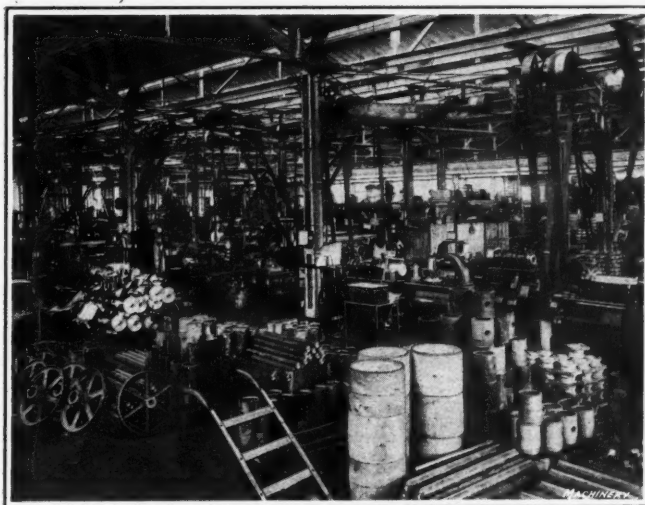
Machine Shop of Holt Mfg. Co., Peoria, Ill.
